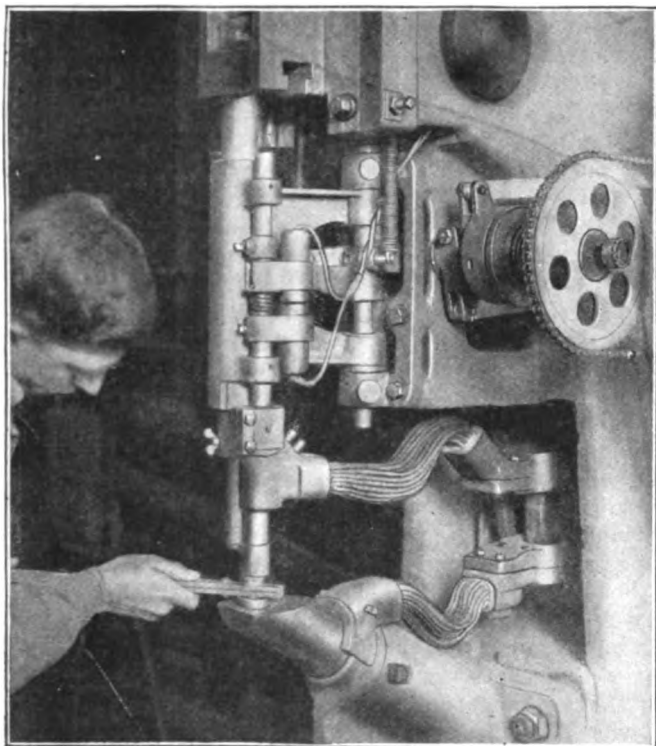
HEATING RIVET IN ROBERT MACHINE
